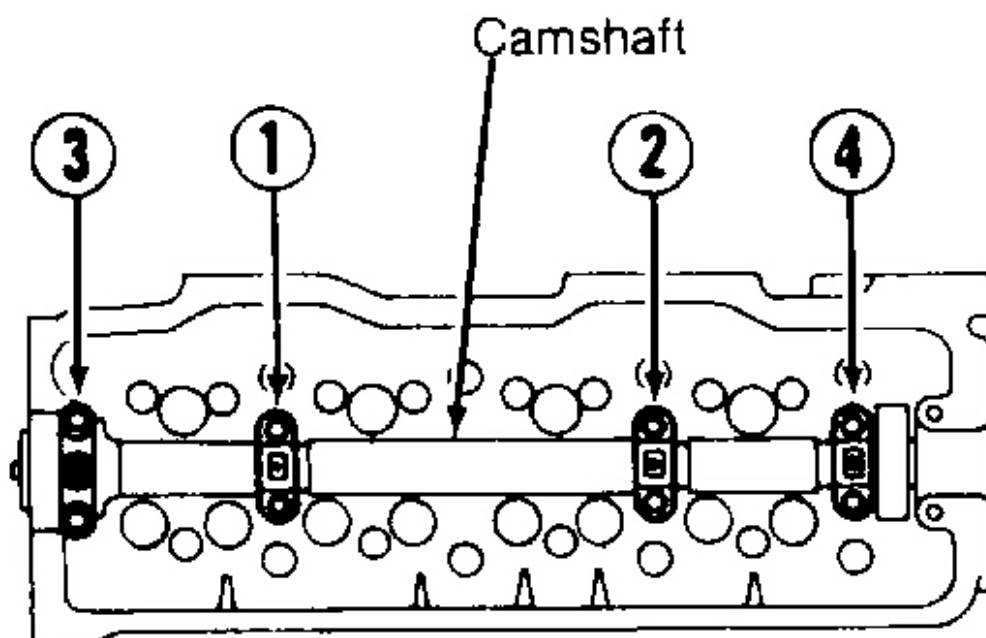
Camshaft Bearing Cap Bolt Installation Sequence
